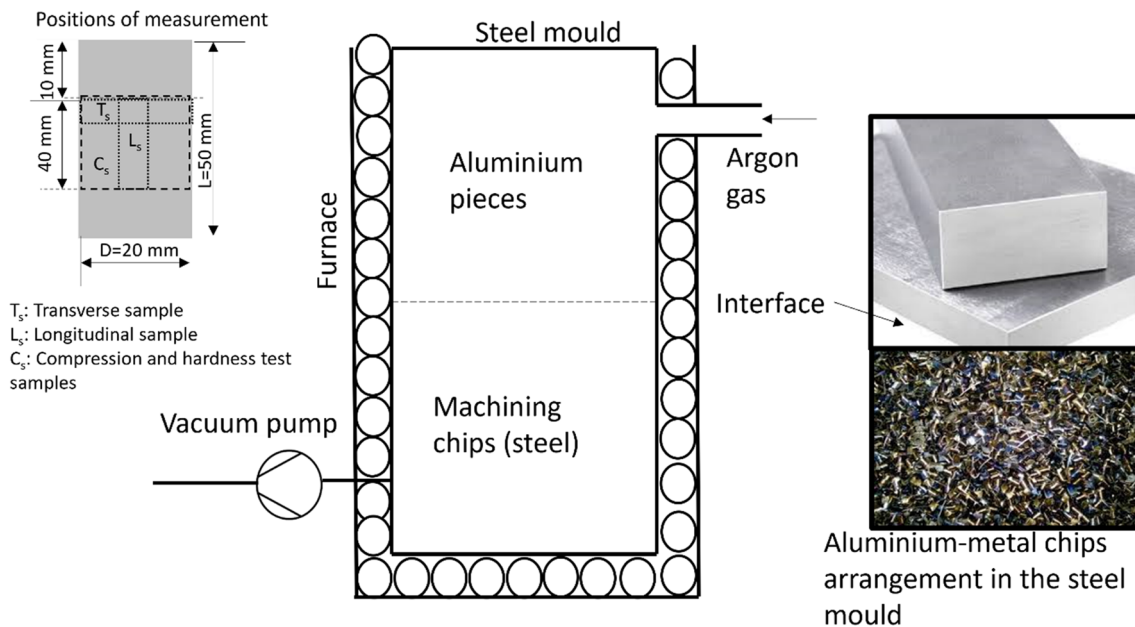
Illustrating the methodology for the preparation of metal foams from machining chips. The arrangement of the aluminium and chips inside the mould steel is shown. Cylindrical samples of diam-
